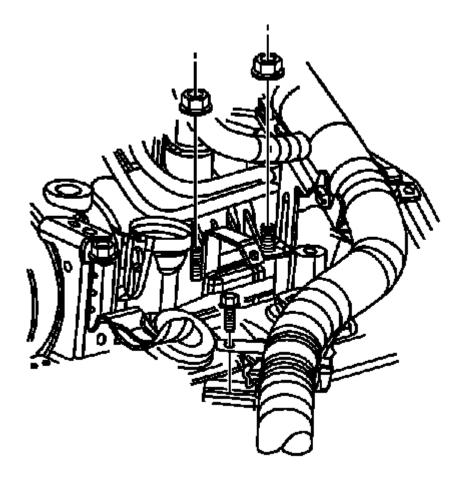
View Of Engine Wiring Harness Bracket & Nuts Courtesy of GENERAL MOTORS CORP.
